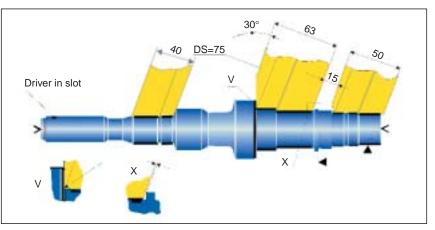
Three grinding wheels mounted as a set can angle plunge-cut-grind a shaft's seven bearing journals and shoulder in a single pass. Dimensions are in millimeters. Key: DS = diameter; x = clearance between grinding wheel and back shoulder of part; v = grinding relief.
